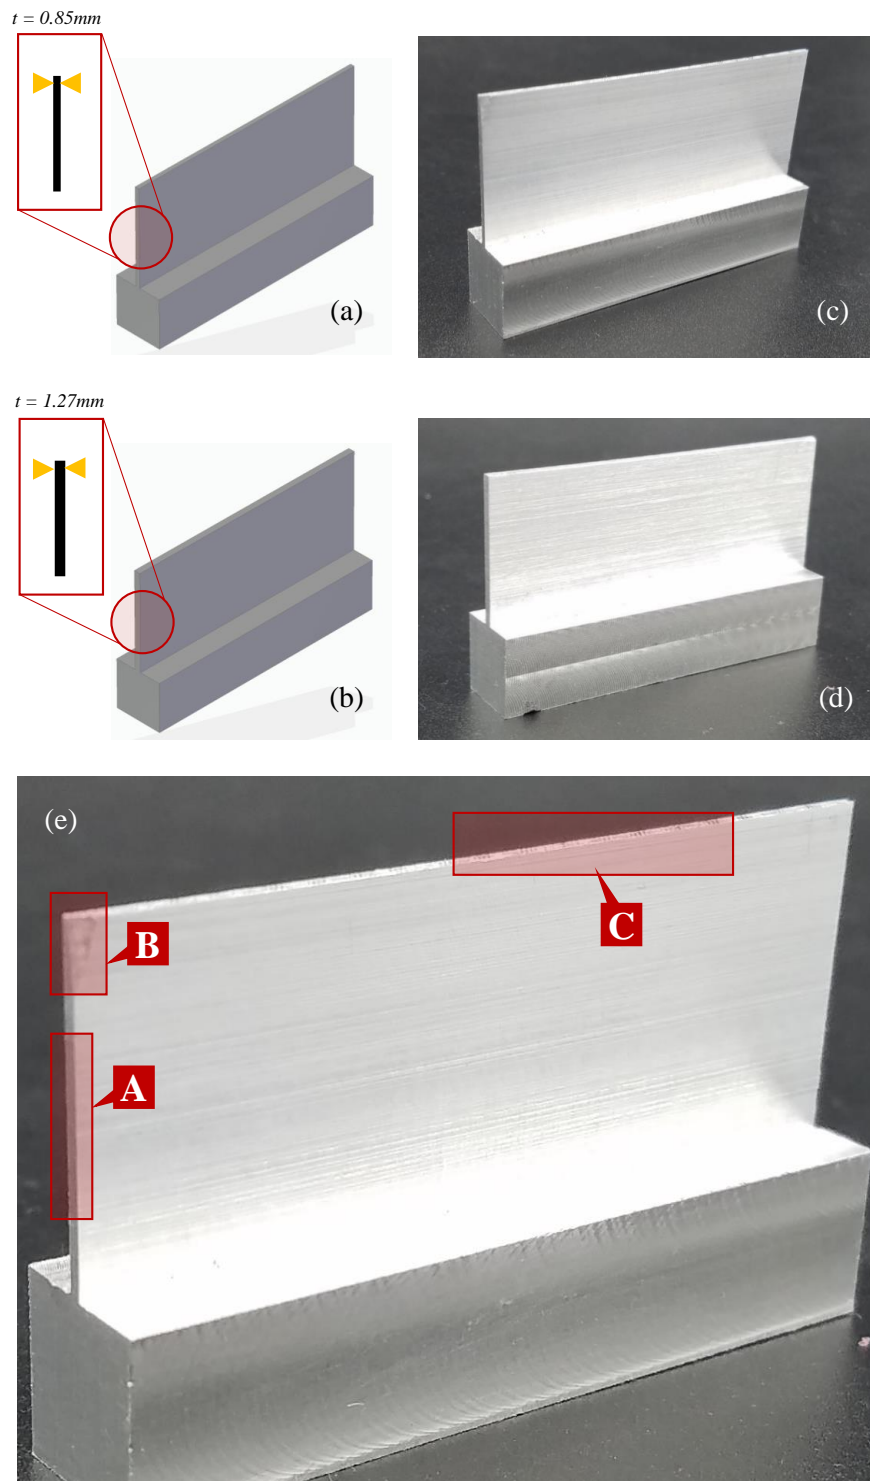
(a) original design, (b) design with manufacturability constraints, (c) (failed) manufactured original design, (d) (successful) manufactured constrained design, and (e) details of failed unconstrained design. Note [A]: inconsistent fin thickness, Note [B]: chipped edge from machining, and Note [C]: poor surface finish on fin tip from vibration.
